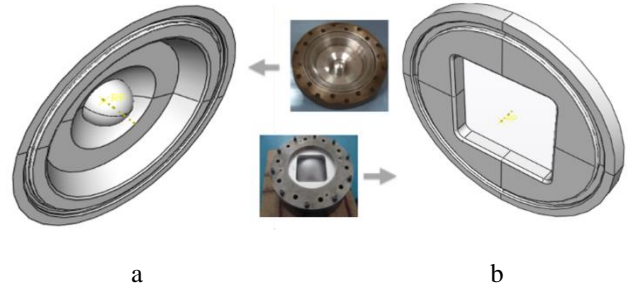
Blank-holder used in hydroforming applications: a - die cavity (CM), b - blank clamp with pseudo-square (SF) shape
